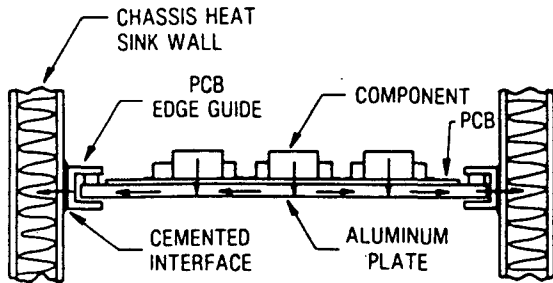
COLD PLATE PCB COOLING WITH HEAT EXCHANGER.
